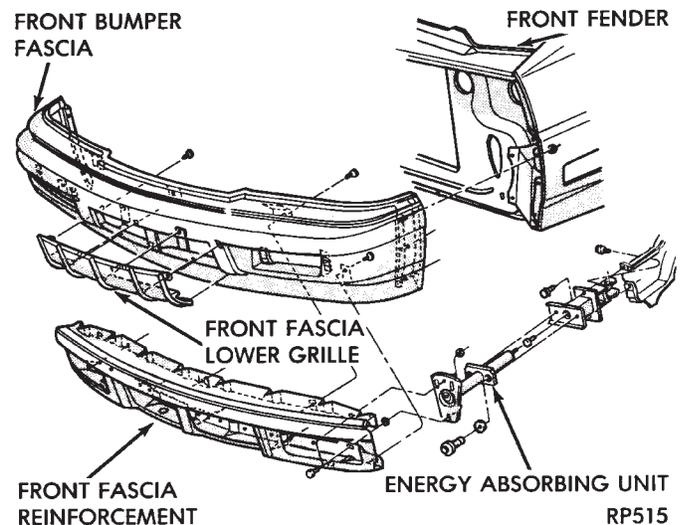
Front Bumper and Fascia—AJ-Vehicle
